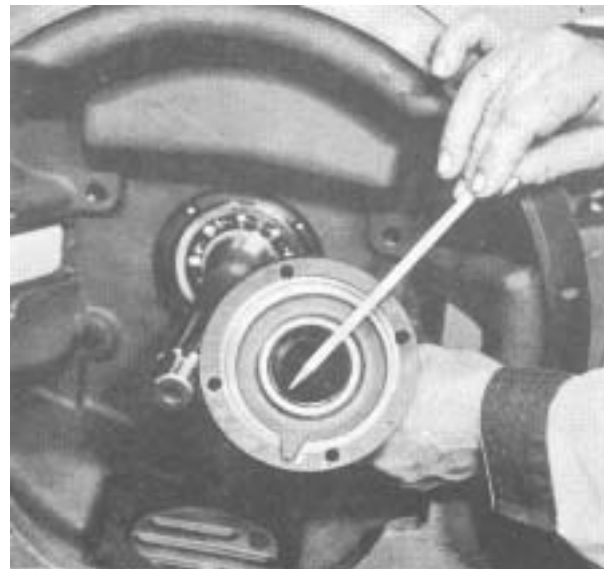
Press oil seal into drive gear bearing cap with lip of seal up. Coat a new gasket on both sides with a grade #2 multi-purpose grease. Position gasket on drive gear bearing cap. Use caution as not to cover oil return groove in bearing cap.
